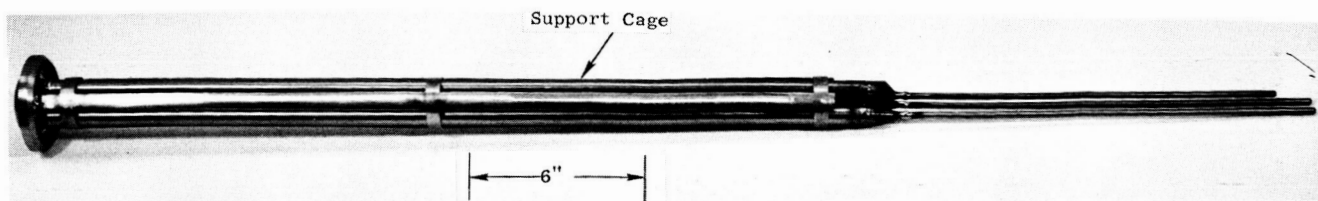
T-111 three-tube condenser tube bundle and support cage.
